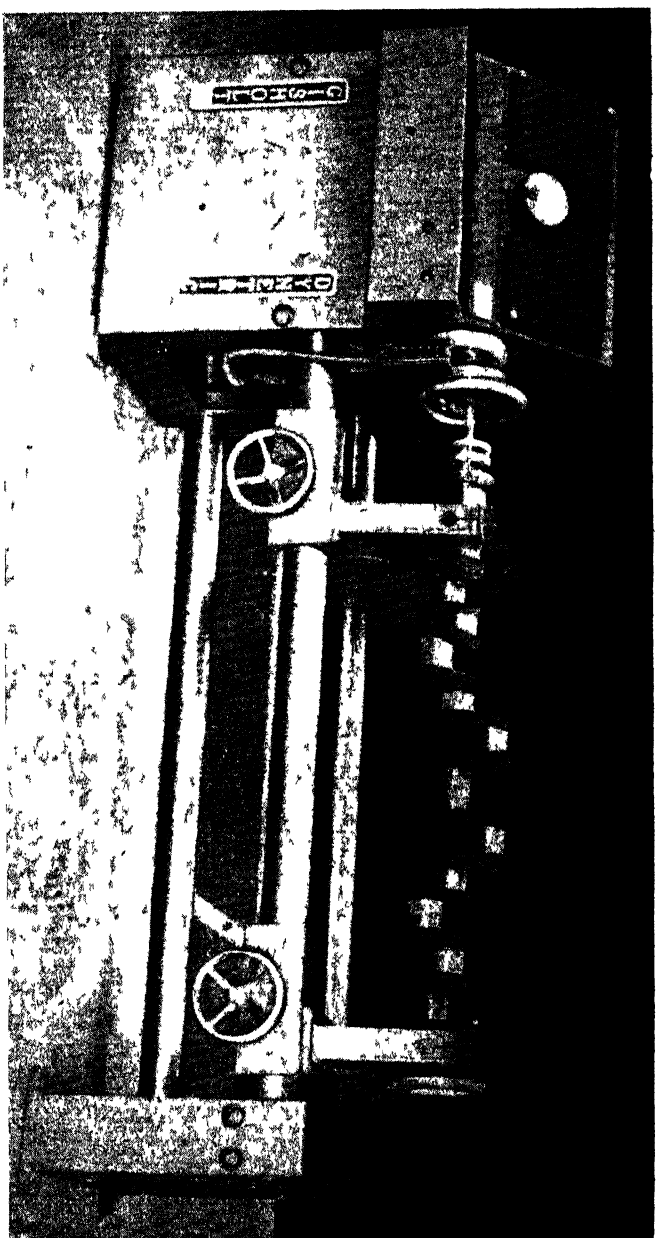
THE GISHOLT TYPE 'C' DYNAMIC BALANCING MACHINE, SHOWING A SIX THROW CRANKSHAFT UNDER TEST
